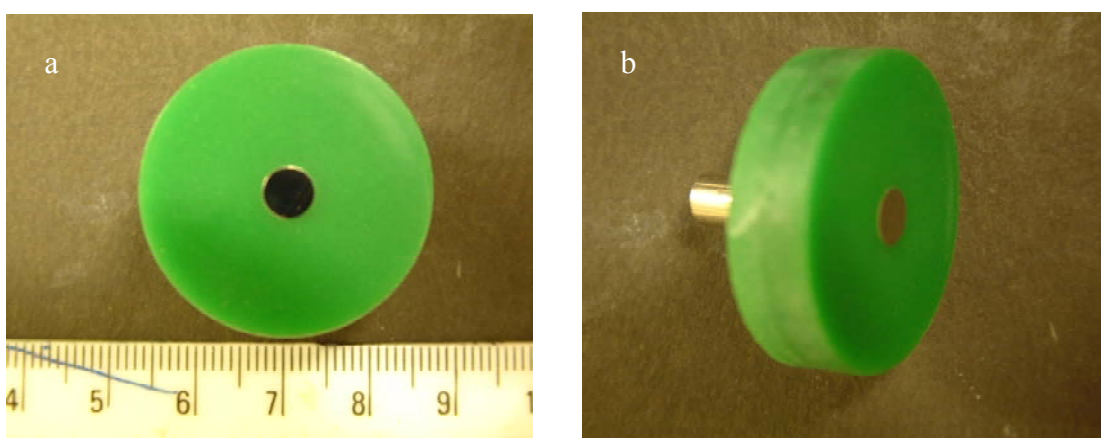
Pictures (a) plan view and (b) side view of 316 stainless steel embedded with resin and machined to the required diameter
